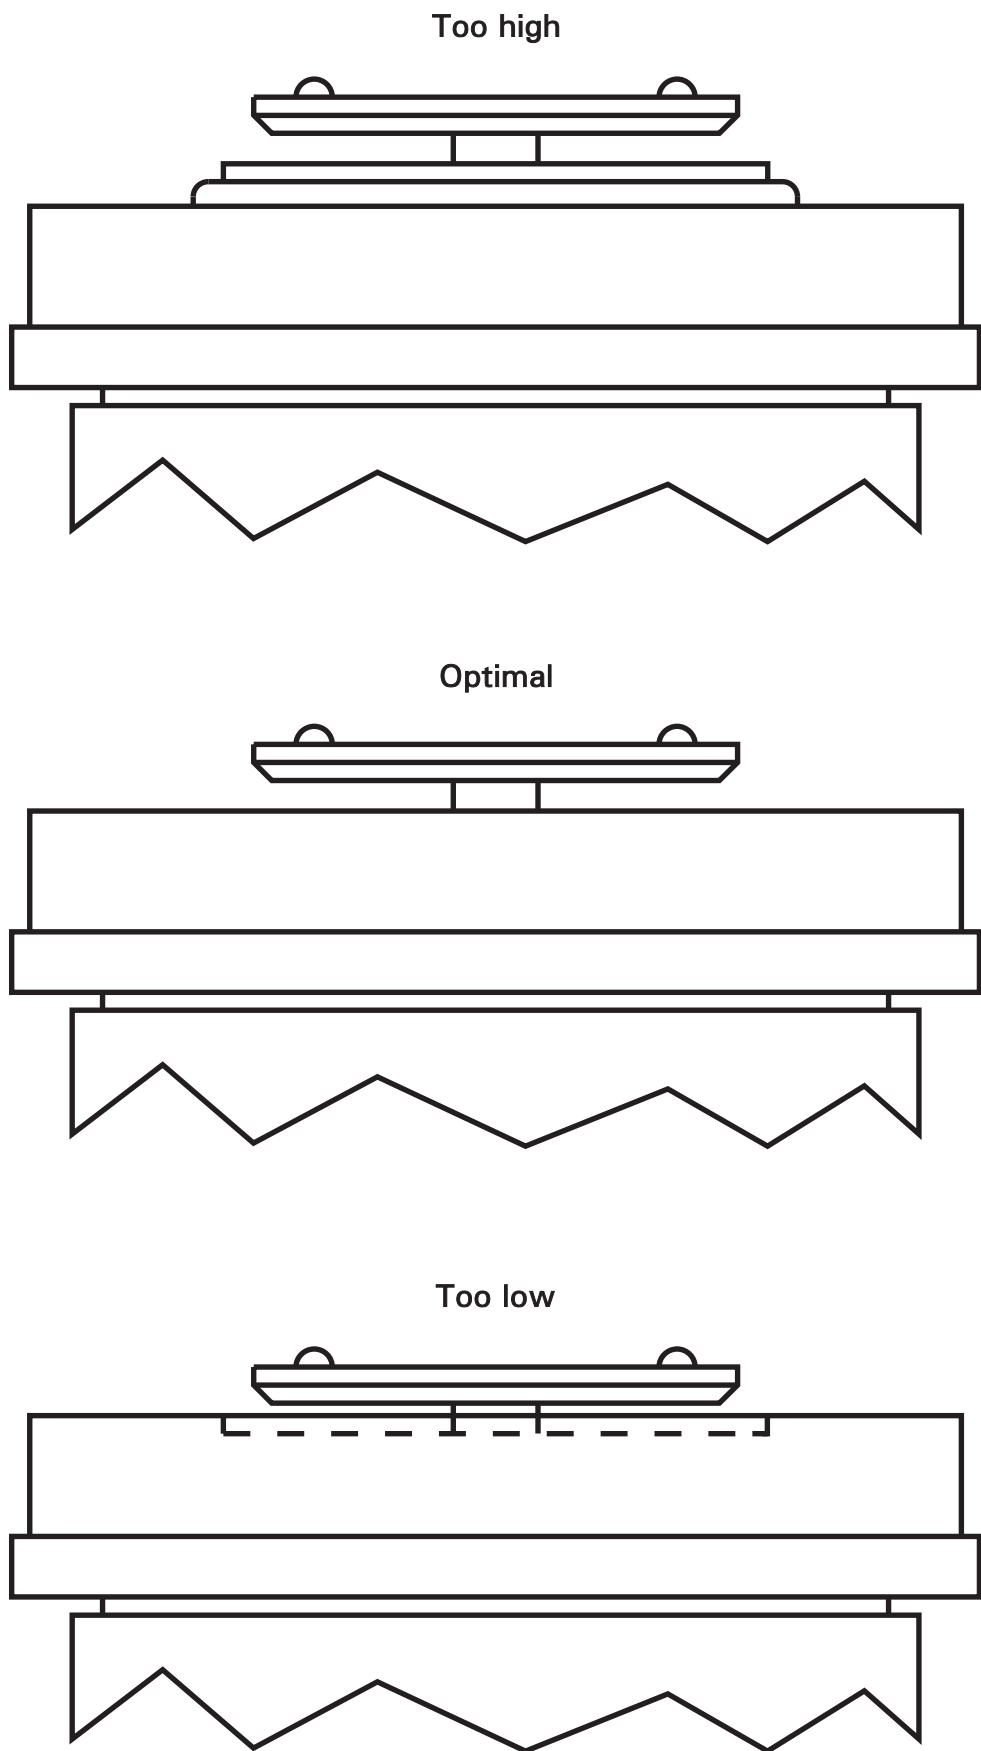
Adjusting the height of the Piston in the Working Cylinder
